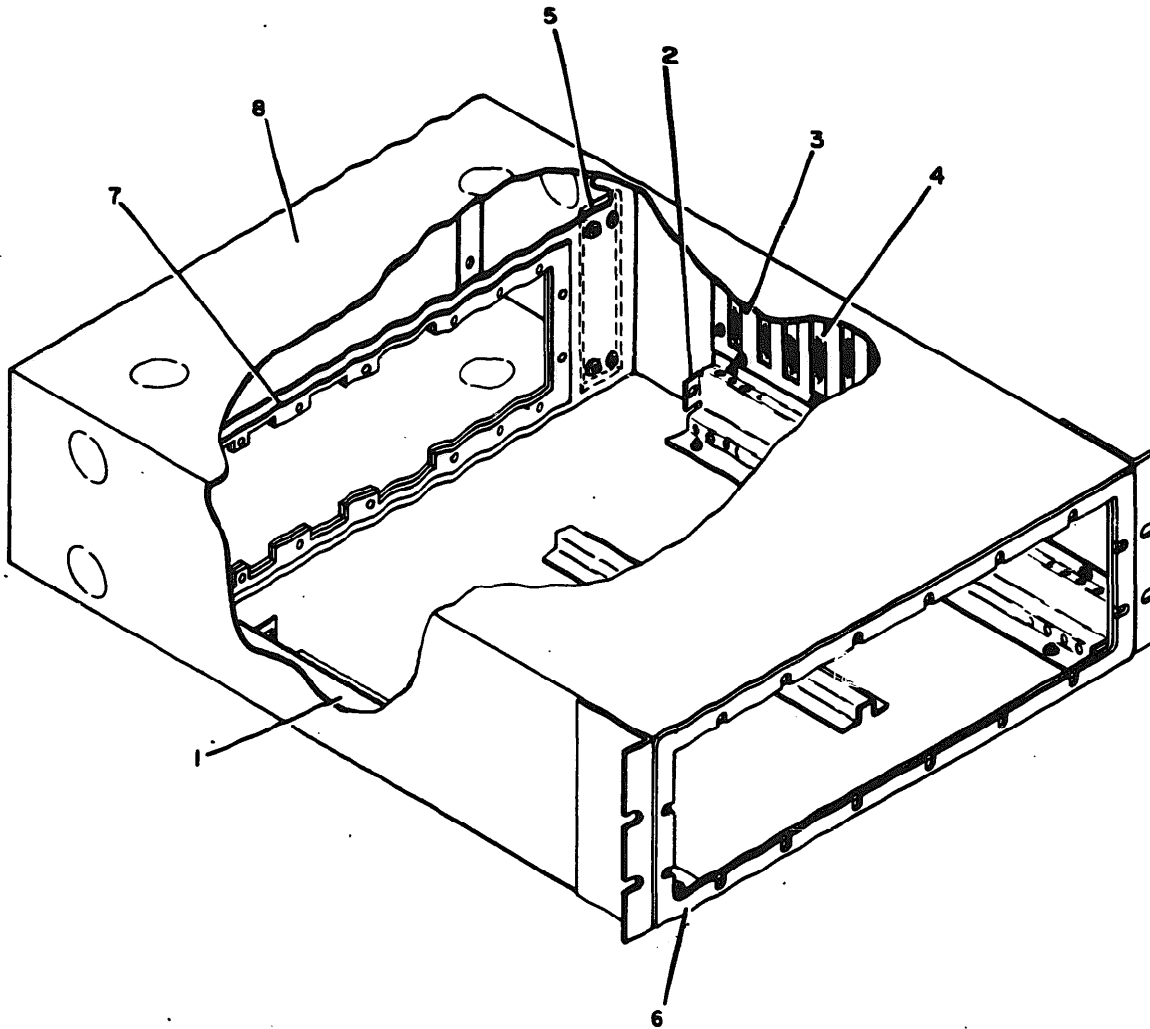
Electronic Equipment Cabinet Assembly A1
